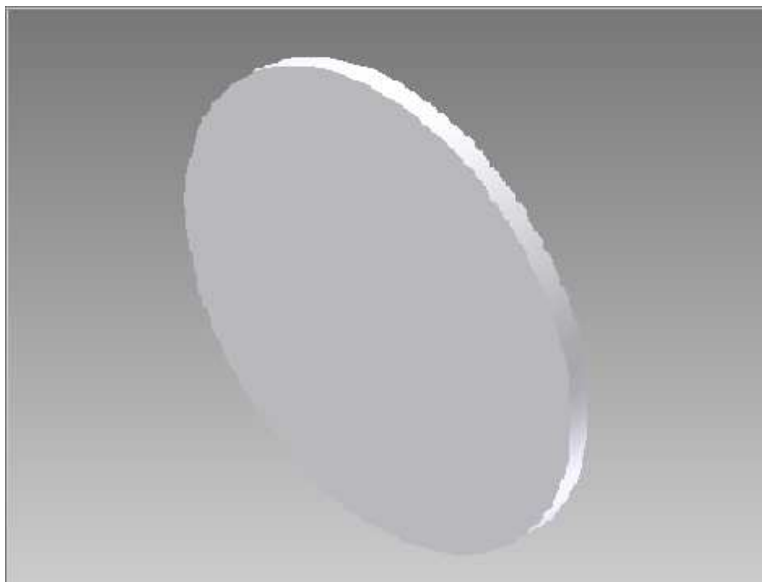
Inventor™ drawing of the large Teflon<sup>®</sup> sealing disc.
